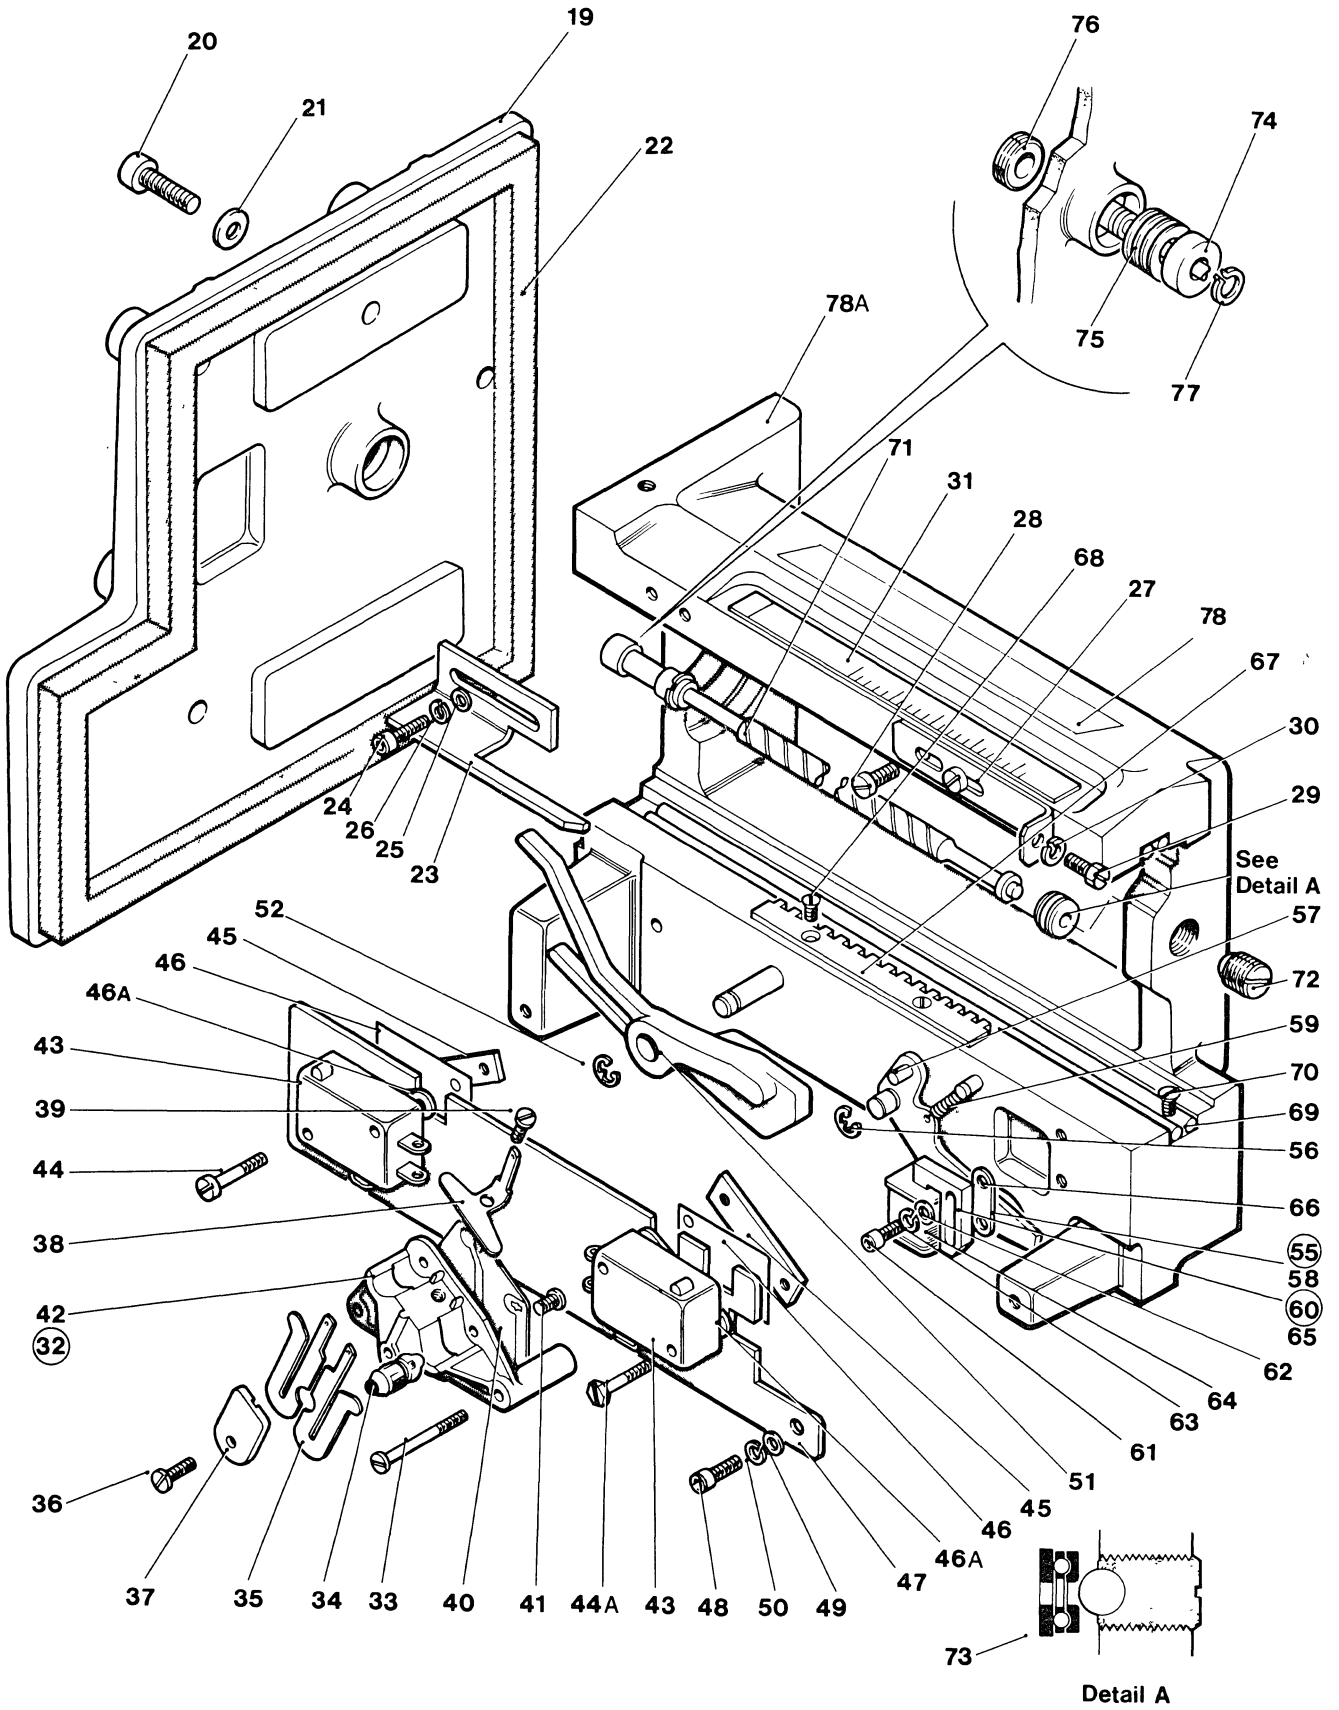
ACTUATOR ASSEMBLY (PART 2 OF 4)
